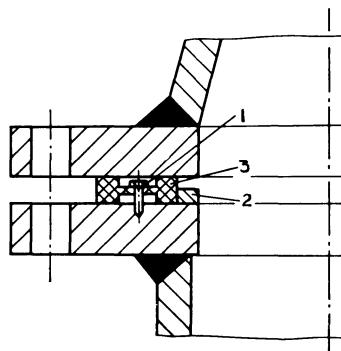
Double ring gasket screwed to the flange. After Alvarez²⁴ (*Courtesy of The American Institute of Physics*)
